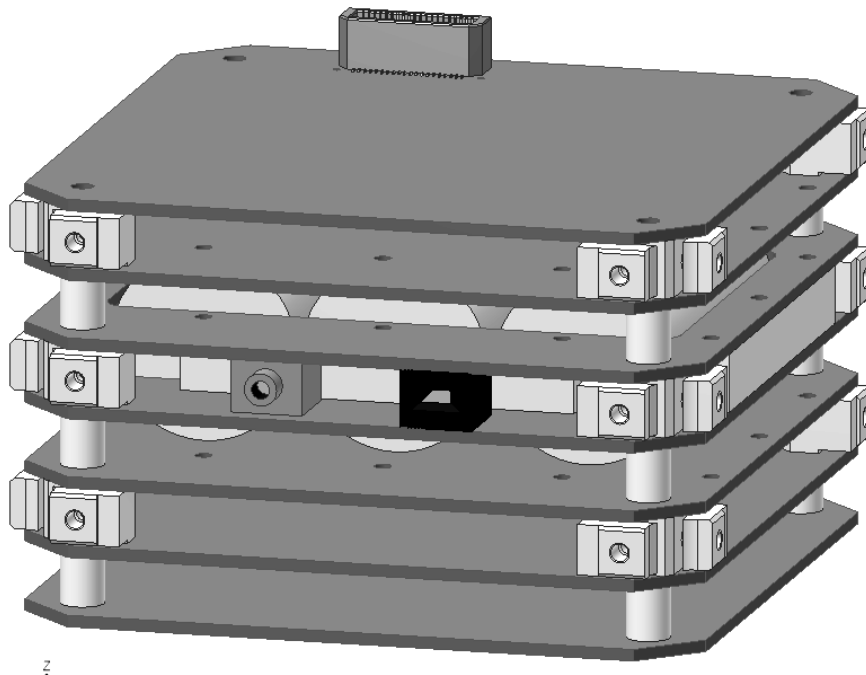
Fox-1 PCB Stack showing the battery cells in the center.
